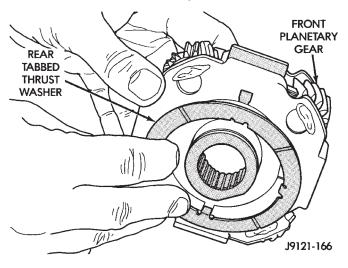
Installing Rear Thrust Washer On Front Planetary Gear
